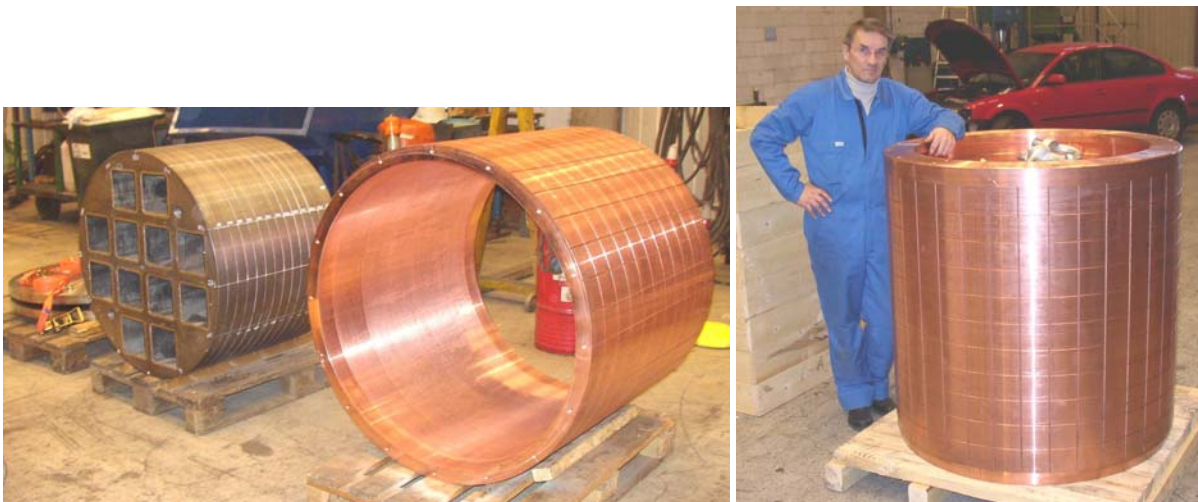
a) Parts of the Mock-up 1 before assembly b) assembled Mock-up 1
